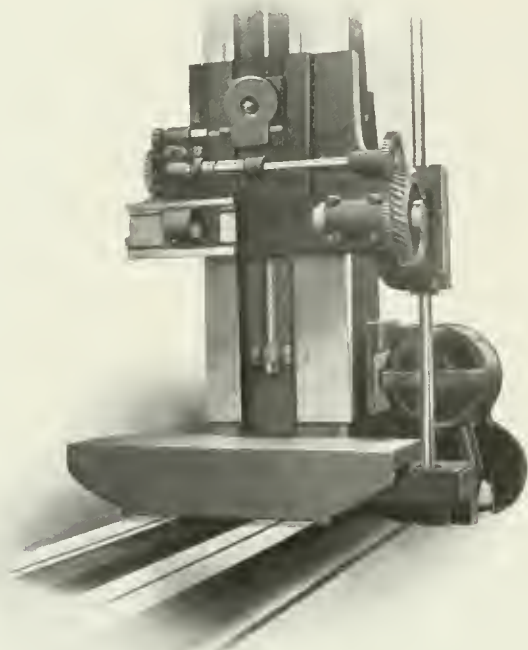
Detail showing Drive to Spindle and Feed Mechanism
